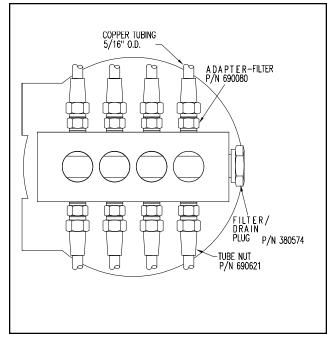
Charging Valve on Bottom of R-13 Integrated Reservoir
